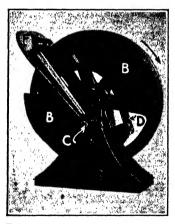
Horizontal-shaft governor with the weights mounted in the sheave.
